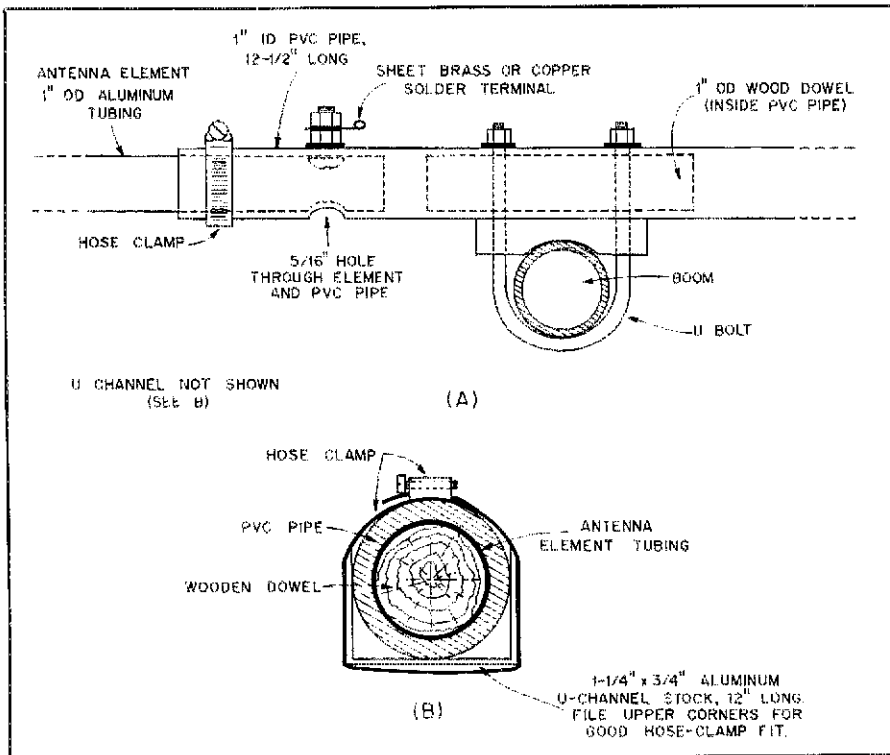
The method of mounting straight LPDA elements is shown at A. At B, a cross-sectional view of this mounting technique is shown. A piece of aluminum U-channel stock is used to reinforce the assembly, but is omitted at A for clarity. Be sure to use all-stainless-steel hose clamps when assembling the LPDAs.
